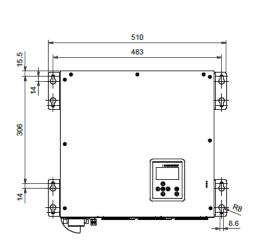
mechanical drawing of ecosine active sync power module (see dimensions in Table 6 and Table 7 below)
